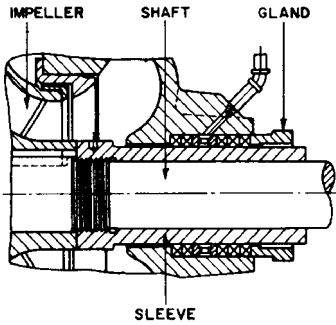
A sleeve threaded onto a shaft with no external locknut
